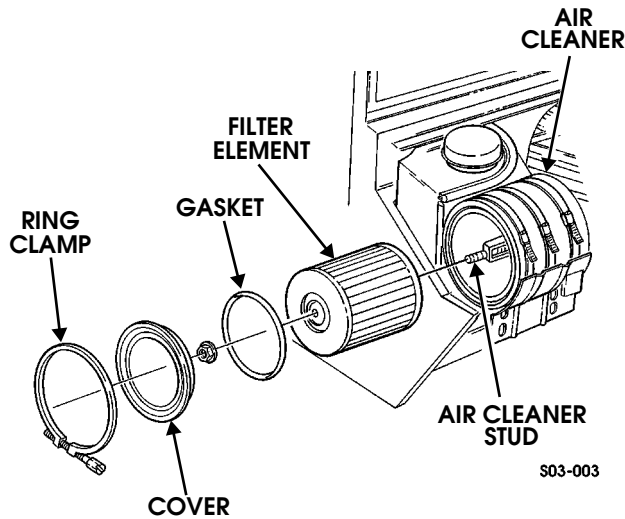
Air Cleaner Filter Element Removal/Installation
